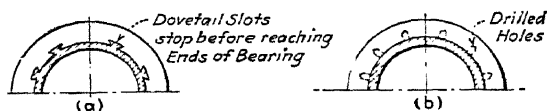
Method employed to make bearing metal adhere to bearing casting.
